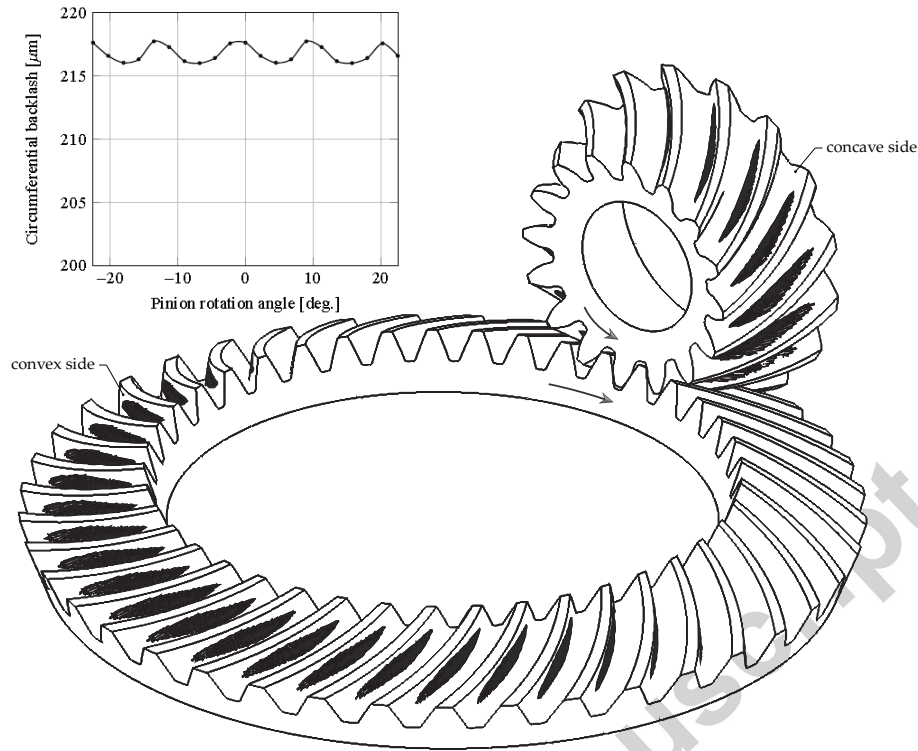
Contact pattern and backlash evolution for a gear drive with adjusted bearing contact.
